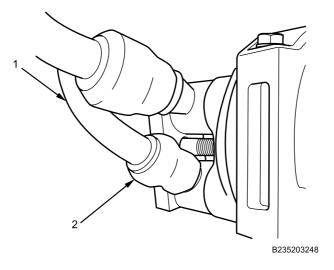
Compressor Discharge Hose Heat Shrink Tubing.
